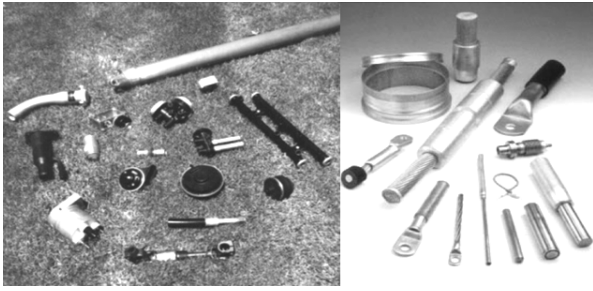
Application of the magnetic pulse welding¹³⁾
